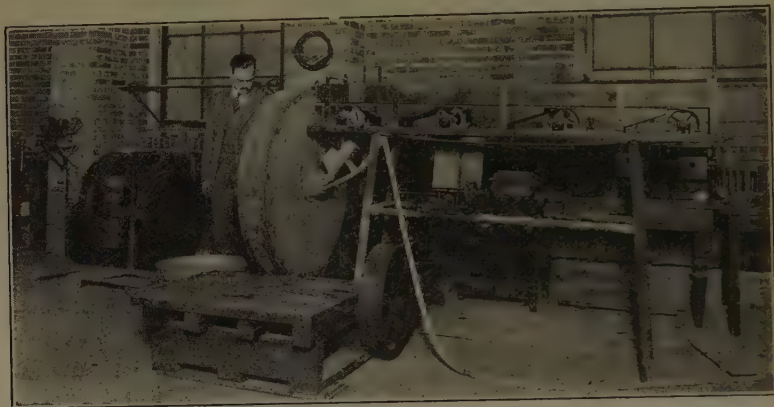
FORTY-TWO INCH MILL WITH FEEDER SET-UP FOR CONTINUOUS GRINDING.
